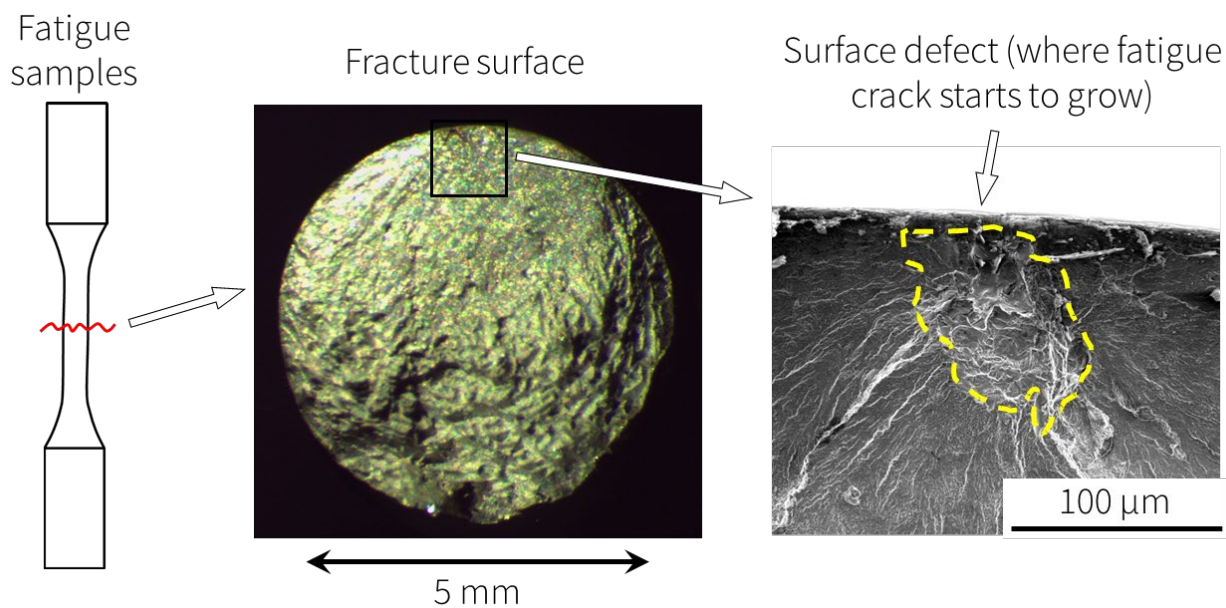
Fracture surface of 3D-printed aluminum alloy sample. [38]
